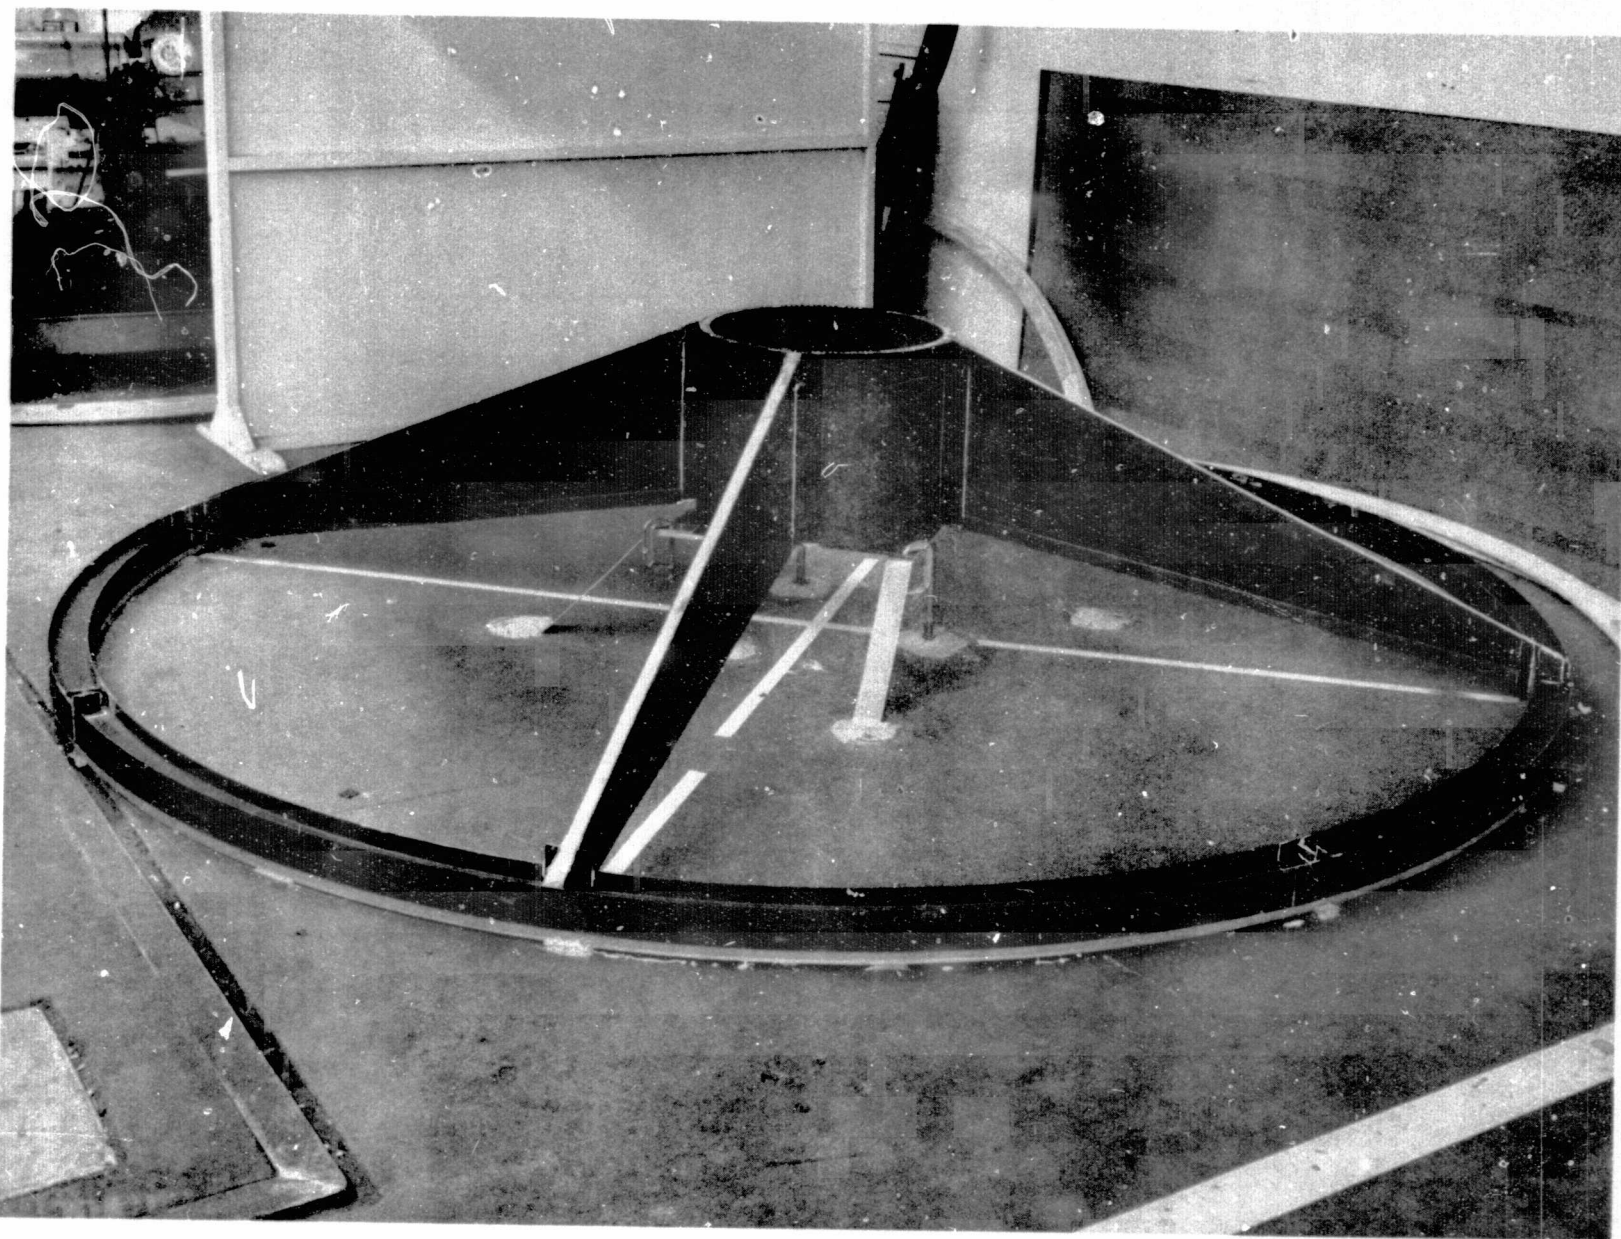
Spider Assembly Installed on Top Truss Ring
